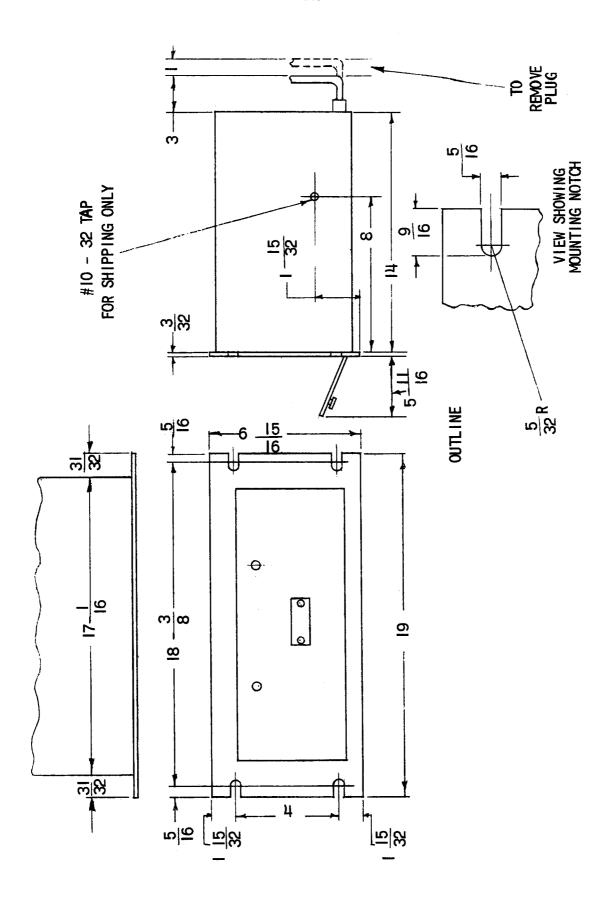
(0227A2037-0) OUTLINE AND MOUNTING DIMENSIONS FOR THE TYPE SFV71A RELAY
